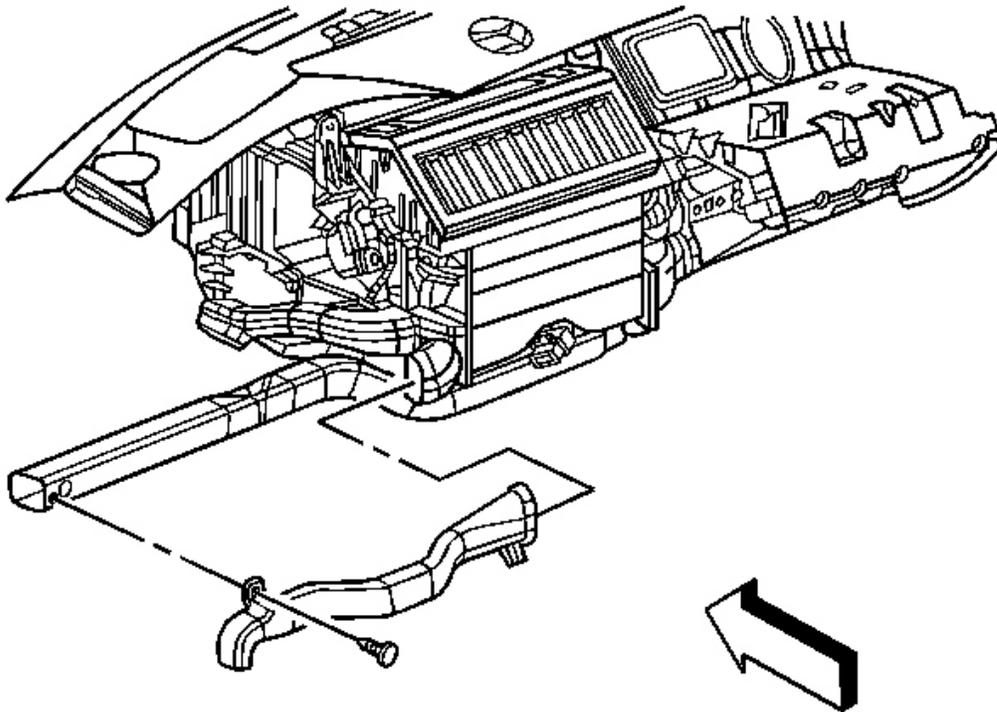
Identifying Floor Air Outlet Duct & Retainer At I/P Beam
